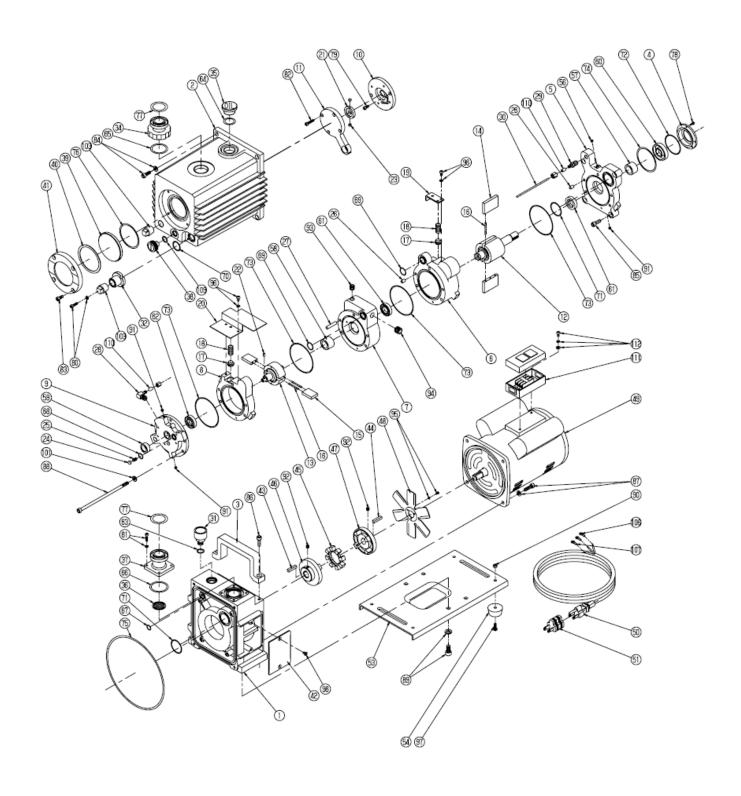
Disassembly drawing of GCD-136X oil sealed rotary vacuum pump
